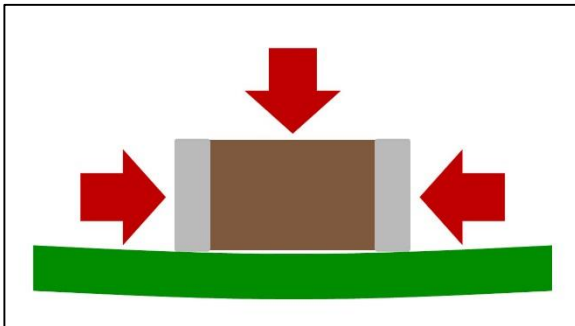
An MLCC on a PCB undergoing compressive forces due to a concave bend
